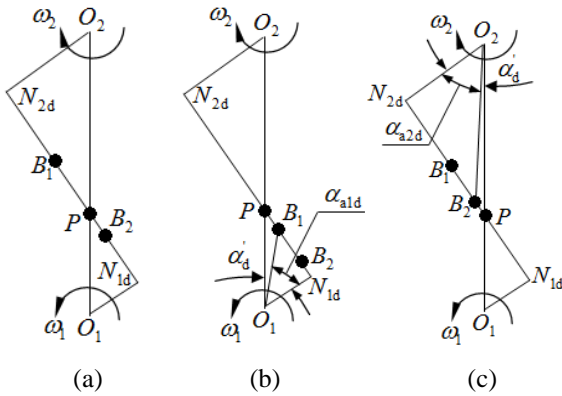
Meshing of involute asymmetric spur cylindrical gear.
